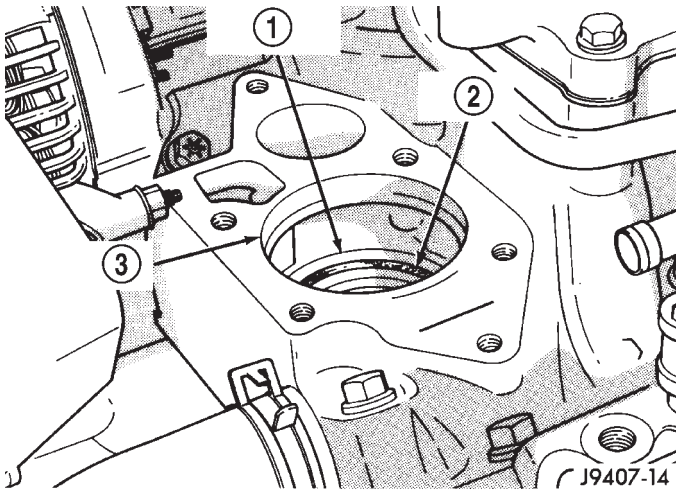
Thermostat Seal—8.0L V-10 Engine
